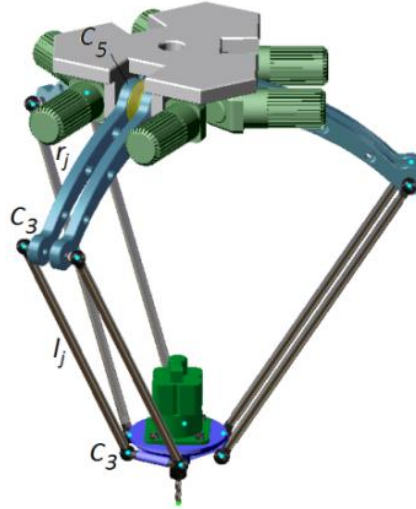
2 The new parallel manipulator 6RSS, highlighting kinematic joints.
